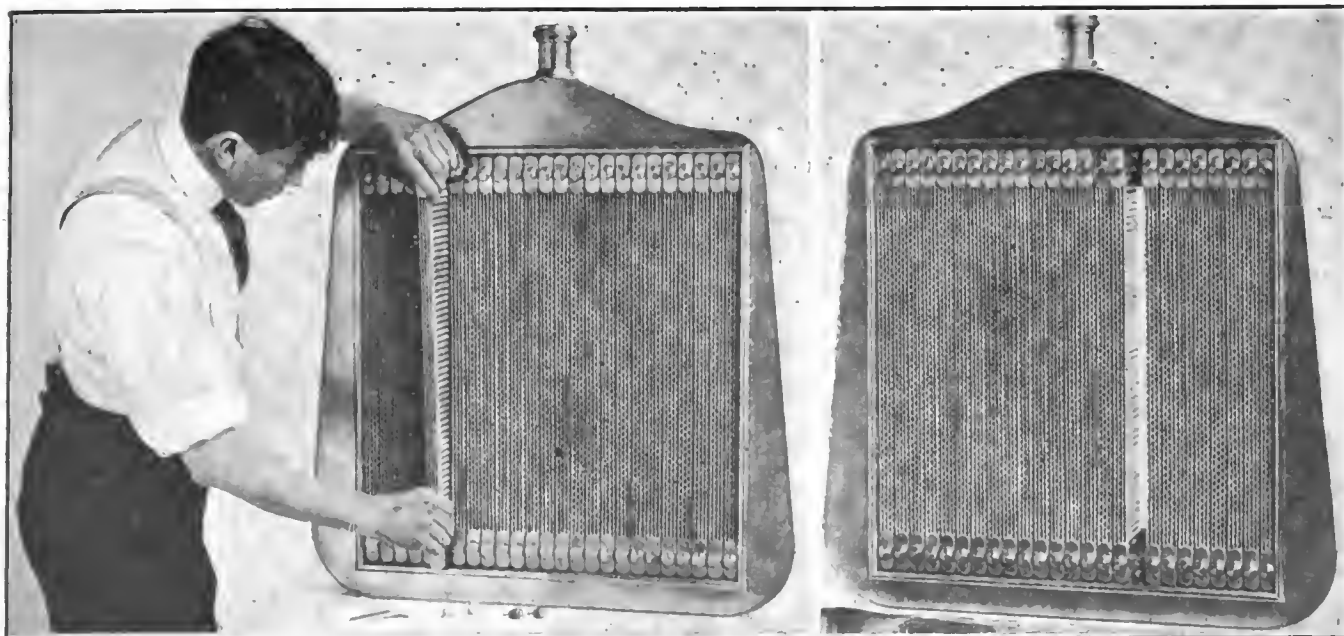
Method of removing individual sections of the new radiator. At the right, appearance when a section is removed
